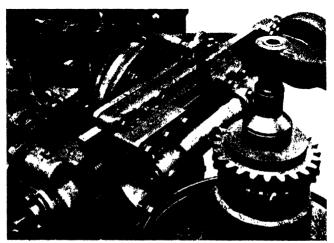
Hobbing a Wormwheel, Using Cross-feed Head and Flycutters on a Prauter Gear Hobbing Machine
